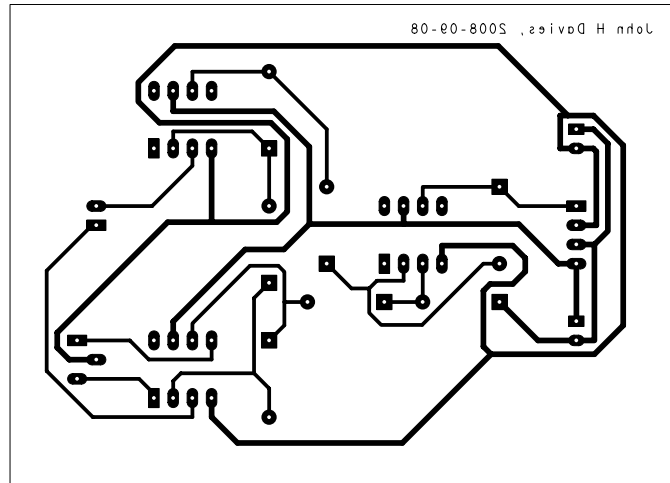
Printout at actual size for manufacturing a single-sided board (bottom layer) with holes in the pads to guide the drill.
